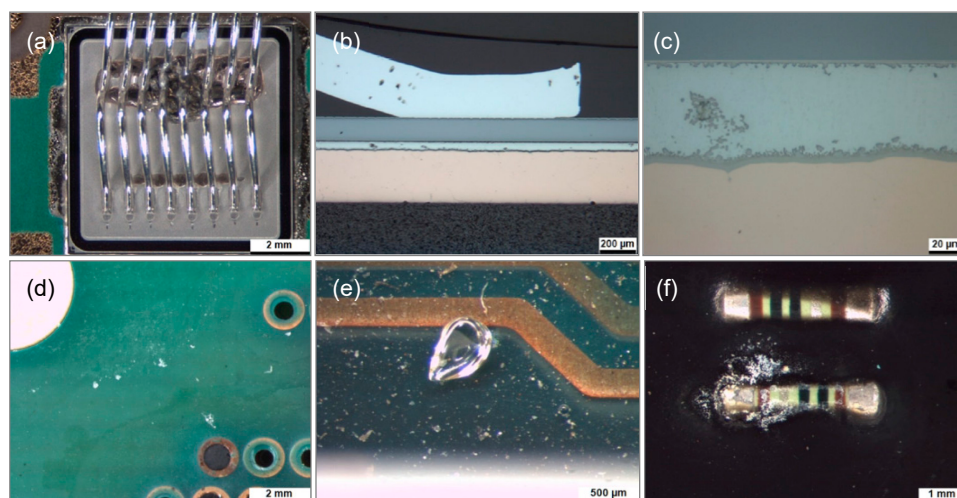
(a) Damaged diode in the power section of an IGBT module; (b) bond contact and (c) chip-solder layer without signs of fatigue damage; (d,e) contamination and (f) corrosion on driver boards of the investigated modules.
